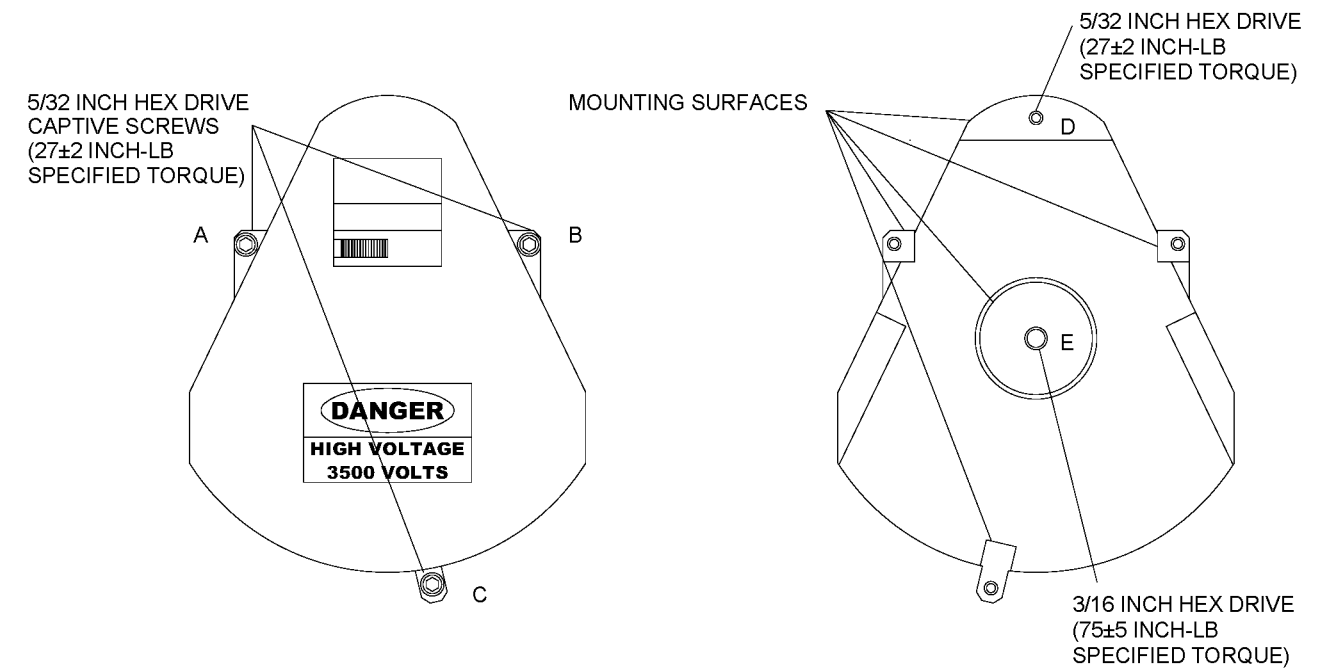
Location of Ring Laser Gyro Attachment Points
